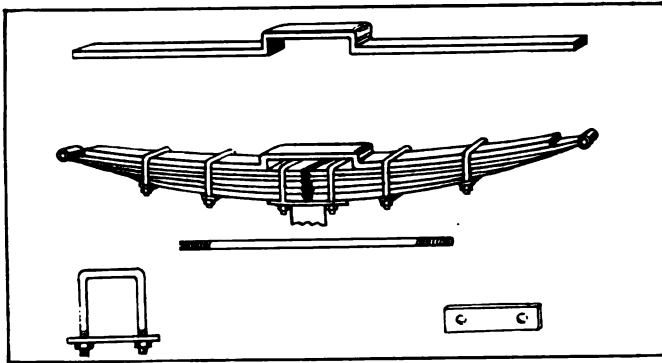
Parts Used in Making a Temporary Repair of a Broken Vehicle Spring.
